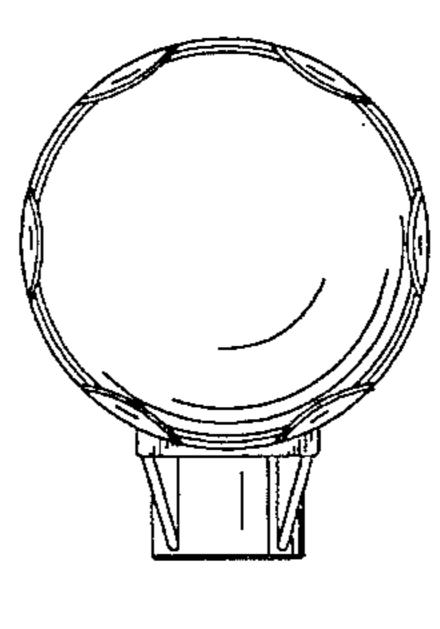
is a front elevational view of a second embodiment of a controller electronics enclosure for liquid handling equipment embodying my new design;
